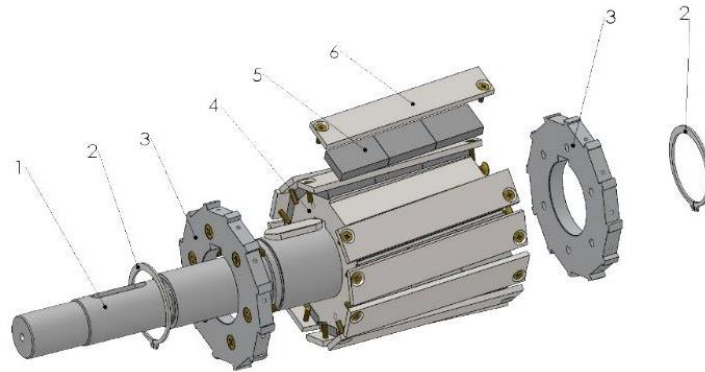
Three-phase synchronous generator mounted rotor subassembly, exploded view 3D CAD model.
